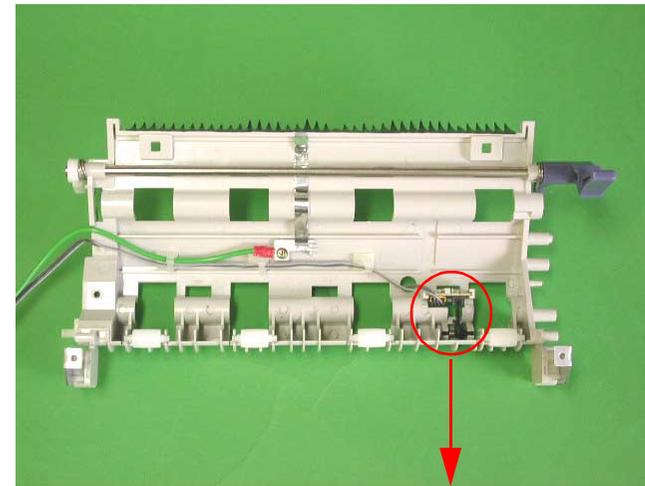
Removing Actuator and PE Board Assembly (1)
